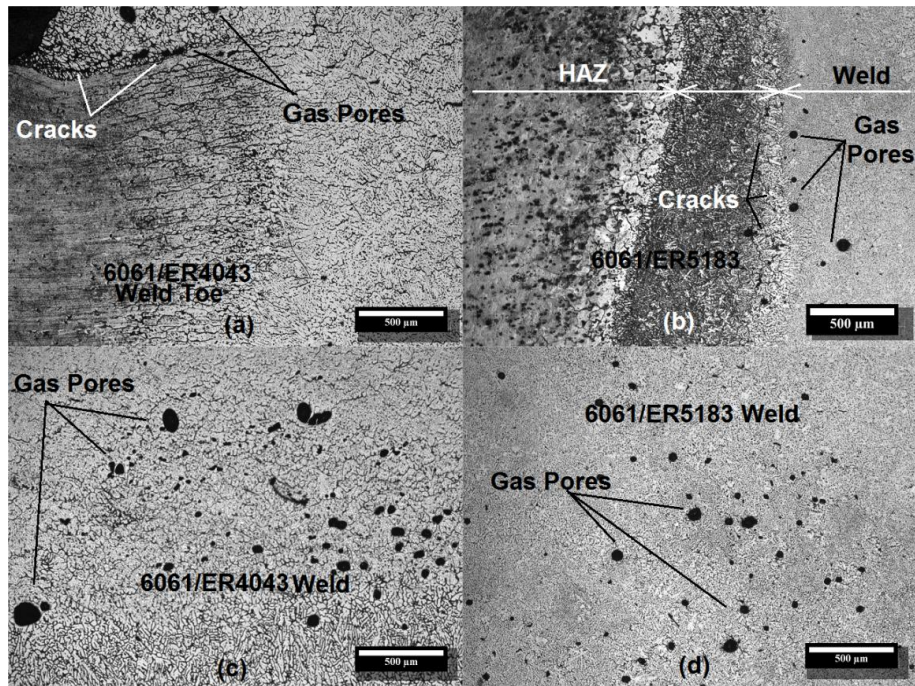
Discontinuities observed in a fully automatic pulsed gas metal arc weld (representative of 6061/ER4043 and 6061/ER5183 welds).
